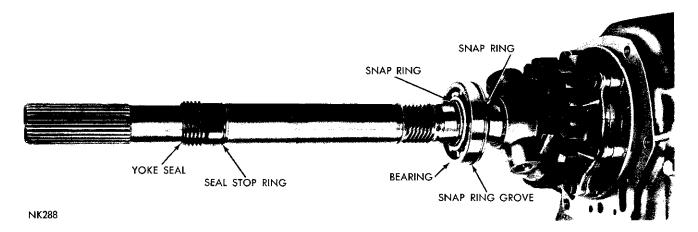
Output Shaft Bearing and Yoke Seal (Chrysler Models)
